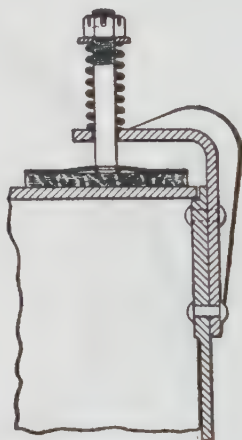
ADJUSTABLE BRAKE BAND SUPPORT.
